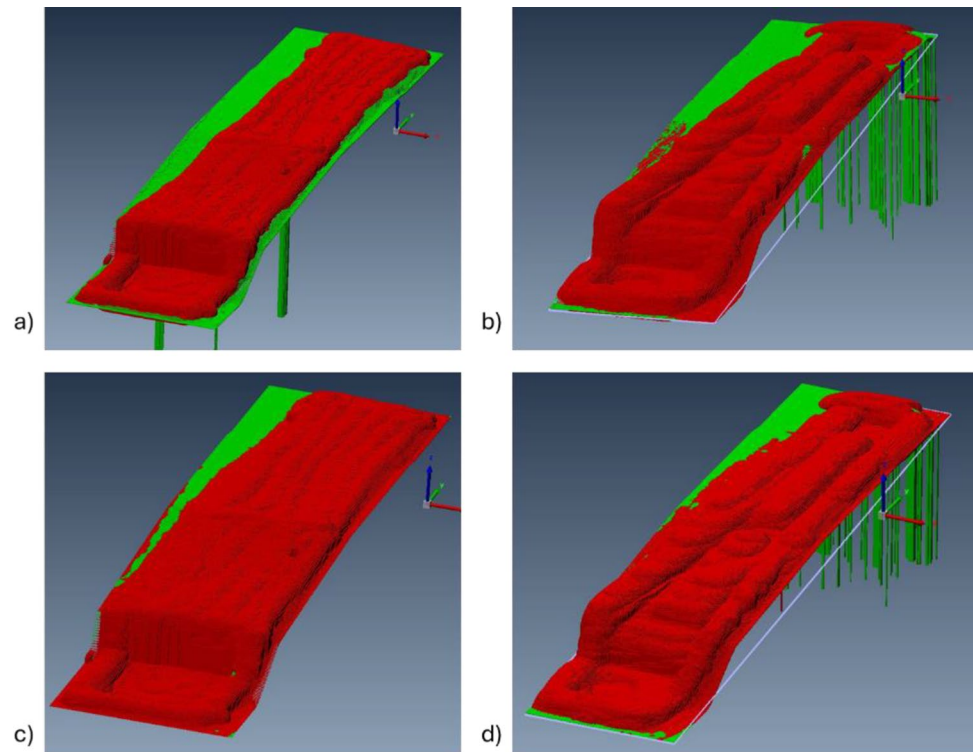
a Conventional repair - forging die after about 2500 pcs., b WAAM repair - forging die after 3000 pcs
